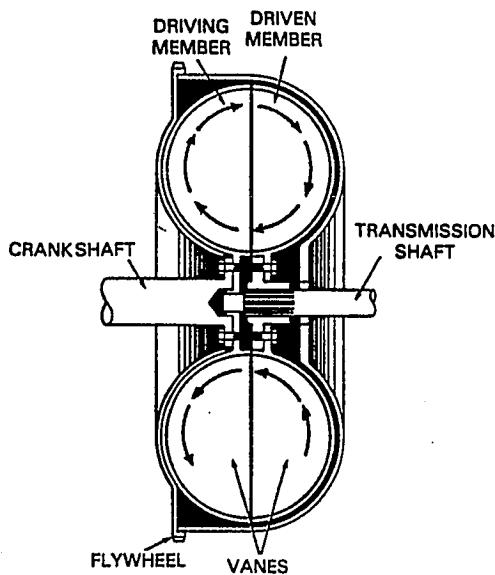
Torus members in place. One torus member is fastened to each shaft. Notice how transmission shaft is supported by bushing in end of crankshaft.
